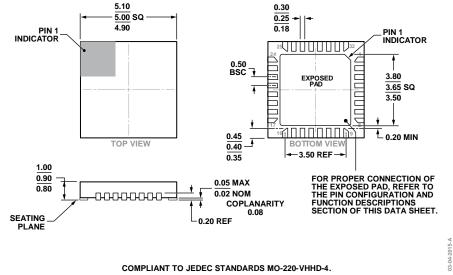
32-Lead Lead Frame Chip Scale Package [LFCSP_VQ] $5 \text{ mm} \times 5 \text{ mm Body, Very Thin Quad}$ (HCP-32-1) Dimensions shown in millimeters
